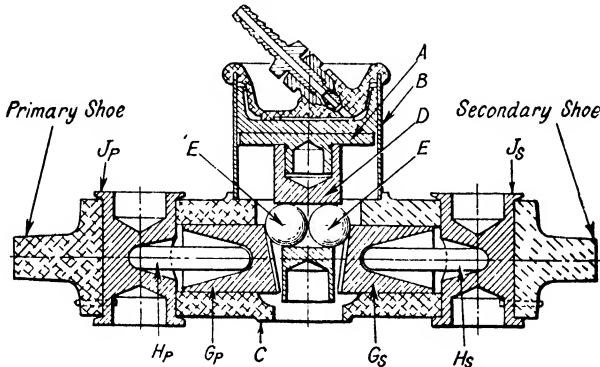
CROSS SECTION BRAKE ADJUSTMENT
